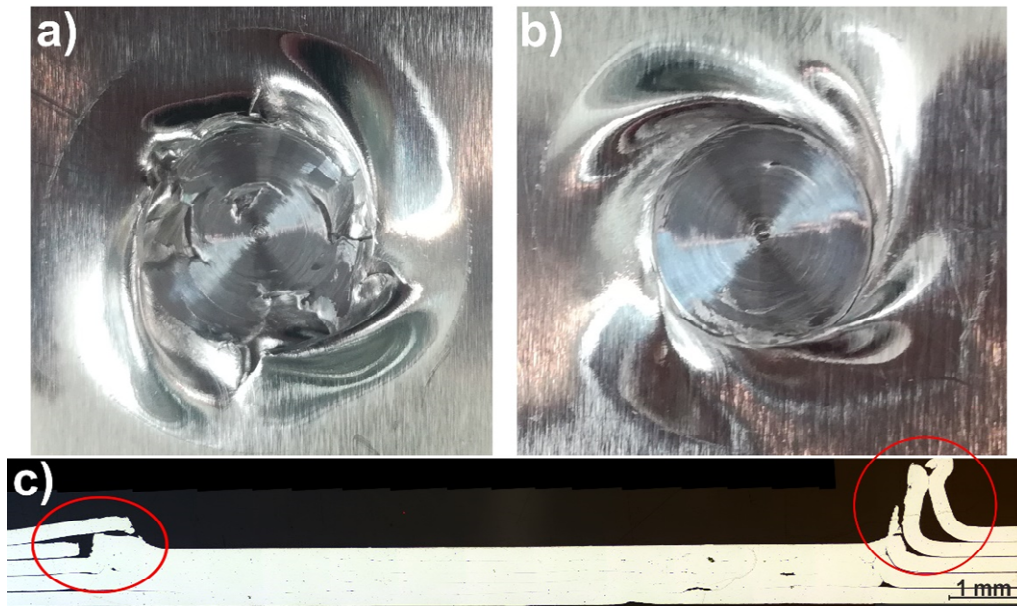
Macrographs of two samples (a, b) and cross-section view of the sample from figure (b) welded with flat tool of diameter 10 mm (five sheets of 0.2 mm thickness) welded at (a) 2000 RPM, 0.2 mm plunge depth and 5 kN axial force and (b) with 2000 RPM, 0.2 mm plunge depth and 2 kN axial force) red circles show tarred edges of the first two sheets after welding with flat tool geometry.
